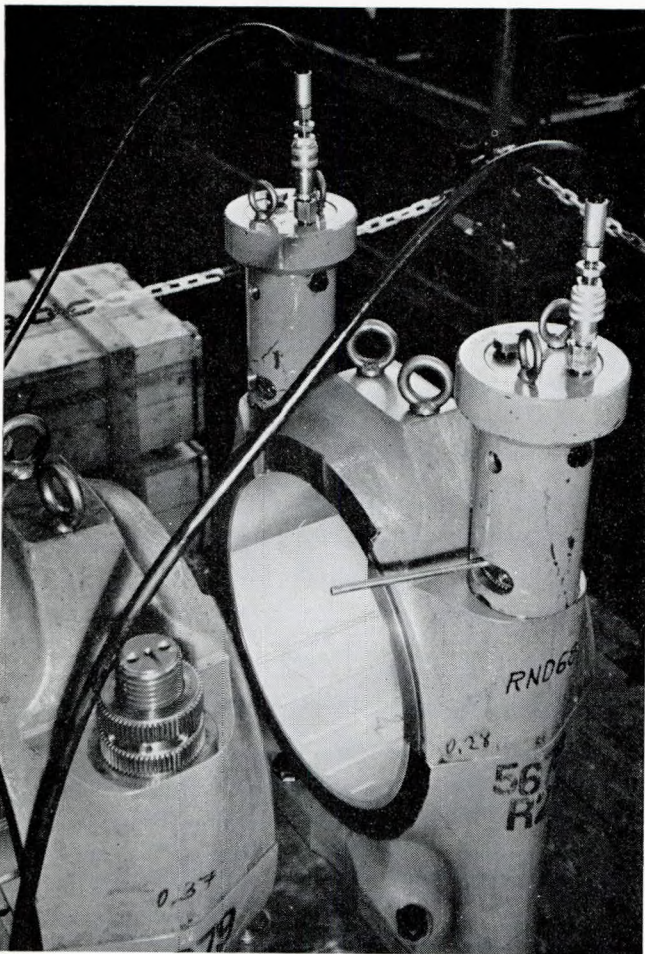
Crosshead with thin shell-bearing and hydraulic pretensioning tool
